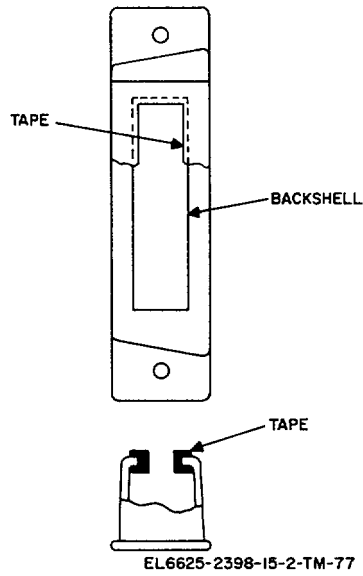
Backshell taping for cable 2A2W1/2A2W2/2A2W3.
